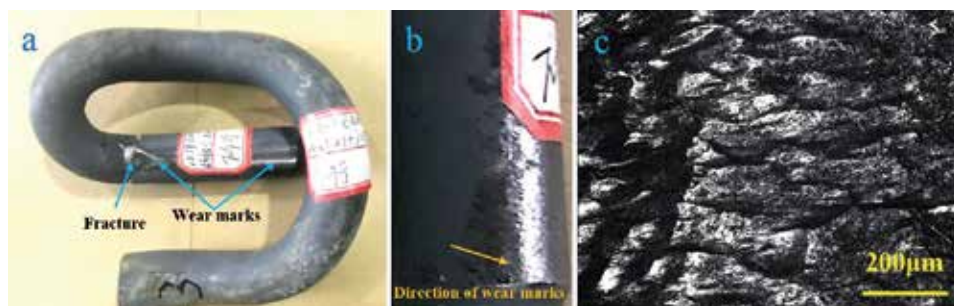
The macroscopic morphology and surface wear scars of the fractured metro fastener: (a) the macroscopic morphology of the failed fastener showing the position of the fracture surface and the wear marks, (b) the obvious wear scar that can be observed on the surface of the straight section of the fastener clip, and (c) the enlarged view of wear scar.
